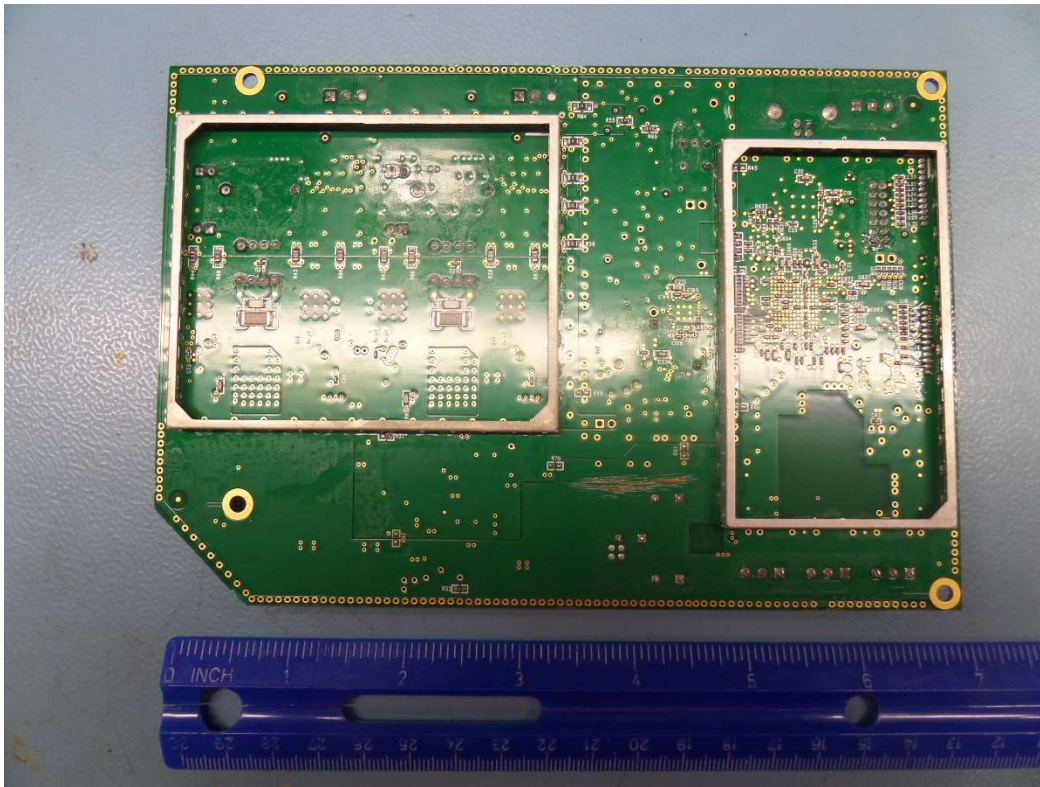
NP10 PAB w/HUB EAS RF board bottom side without shields
